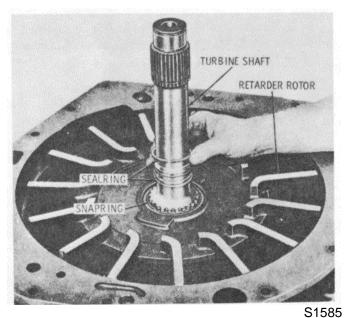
Installing Seal Rings onto Turbine Output Shaft
